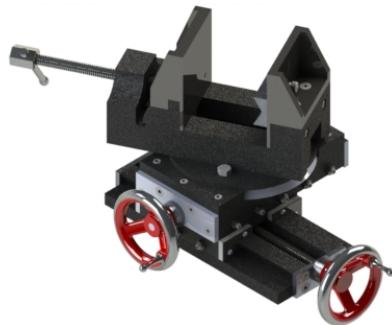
SolidWorks rendering of the Full Fixturing Mechanism
